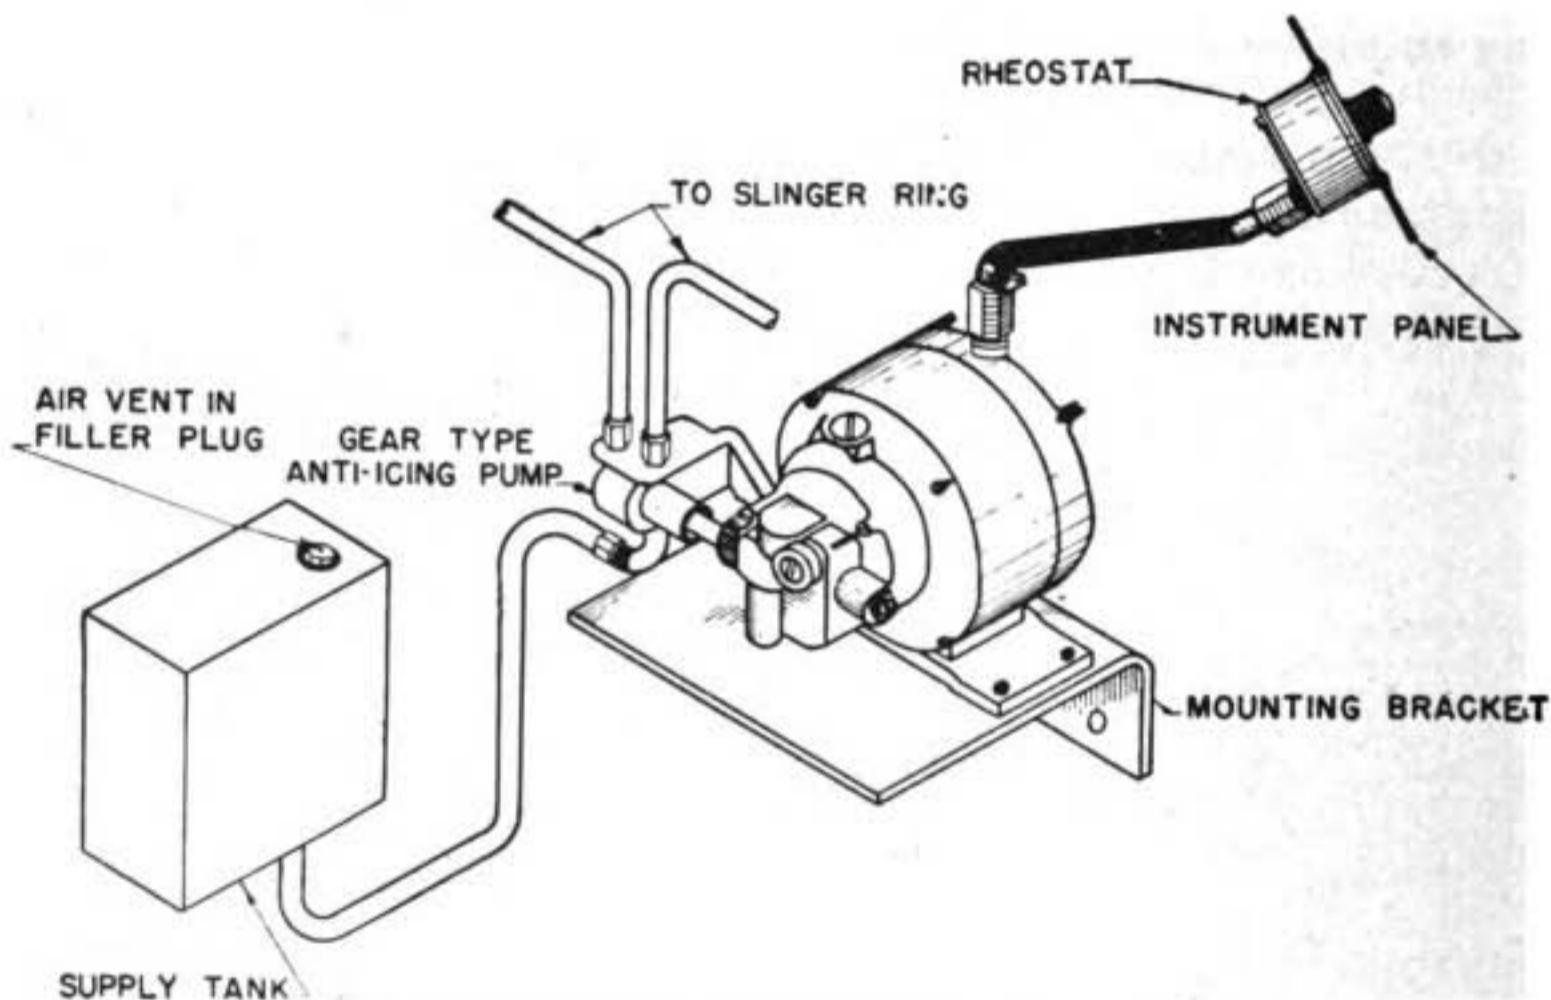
Typical anti-icing-system installation using a gear type pump.
